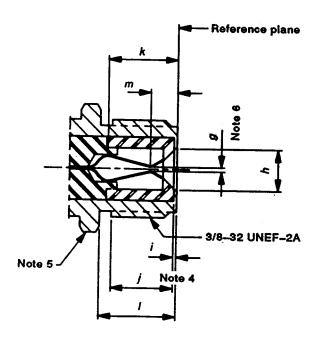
Connector with socket center contact (for dimensions, see table 1)
